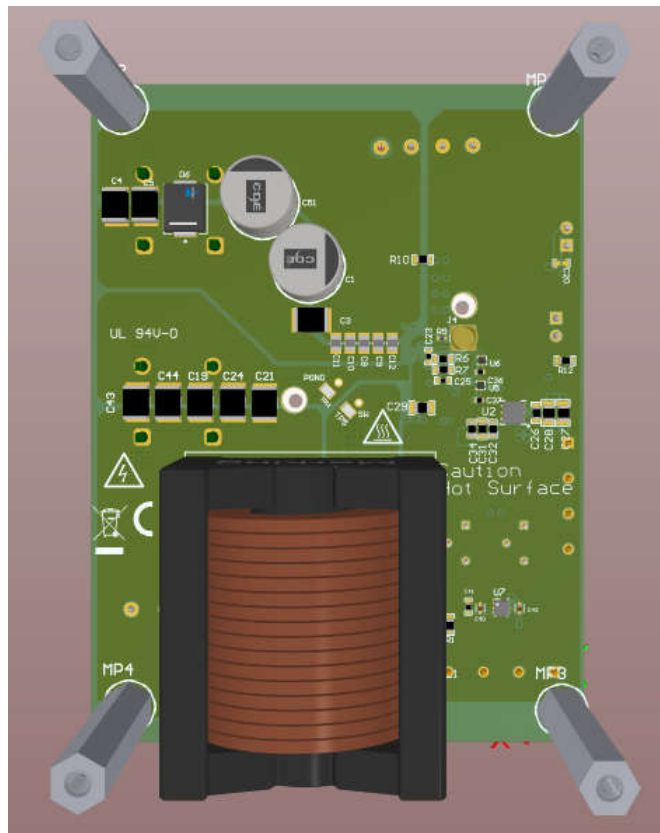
LMG210XEVM-143 Board (Bottom View)
